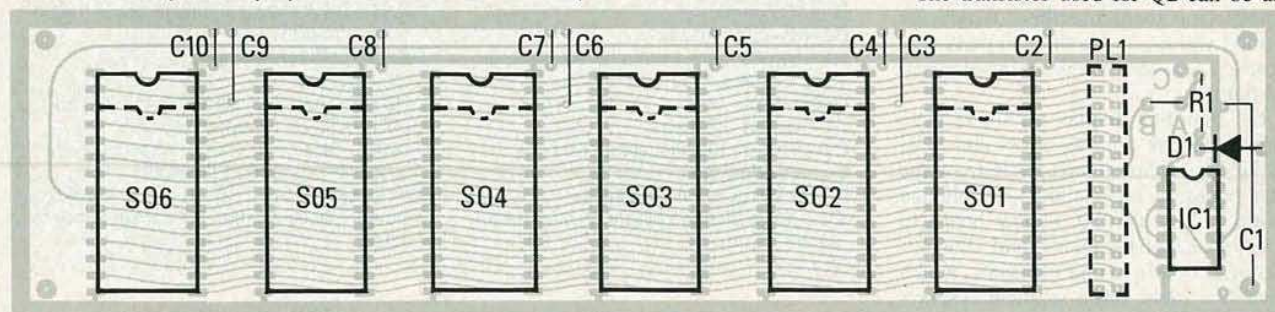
MOUNT ALL PARTS except PL1 on the component side of the board. The jumper connecting points A and B disables reading from sockets SO2-SO6.
